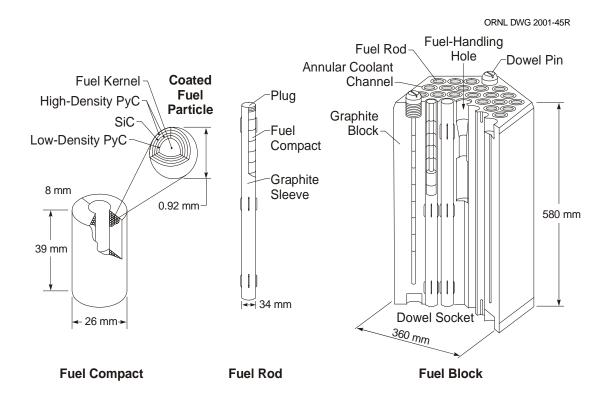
Japanese High-Temperature Test Reactor fuel assembly with fuel rod.
